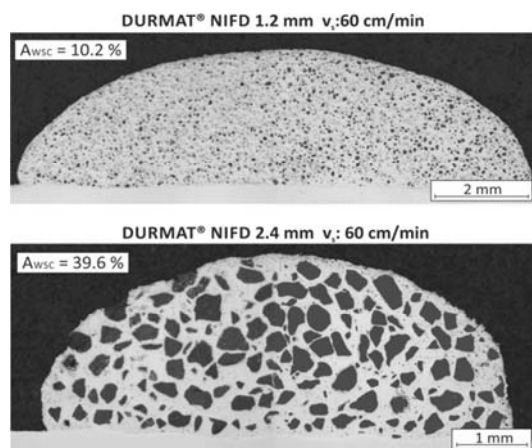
Cross-section of GMAW hot wire hardfacing: Welding speed $v_s = 60\text{cm/min}$
